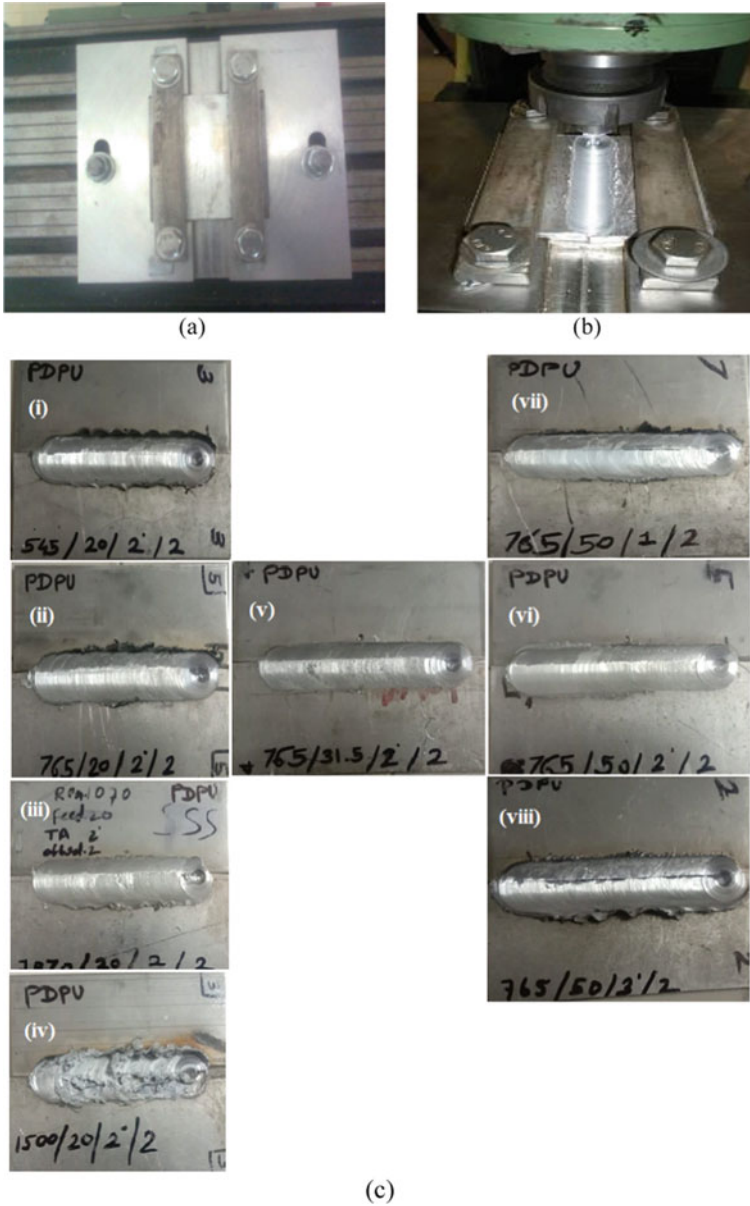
a FSW Fixture, b experimentation during welding and c welded samples
